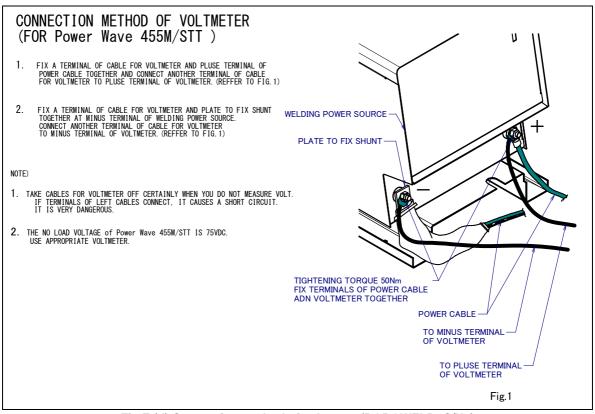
Fig.E (d) Connection method of voltmeter (ROBOWELD iC/H2)
